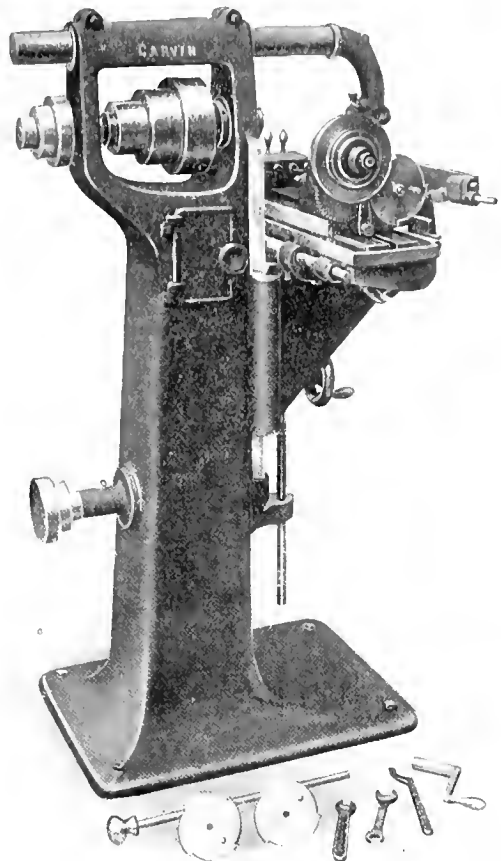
End View of Tap Fluting Machine, showing Indexing Mechanism, Etc.
